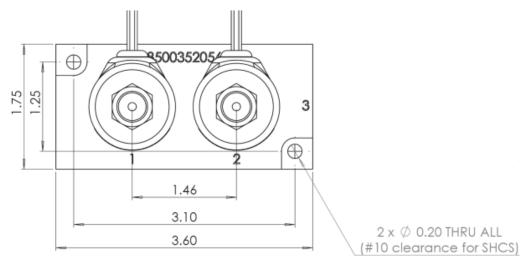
10500-3520-MB32 3520 B multiplexer valve accessory - dimensions in inches [mm]
